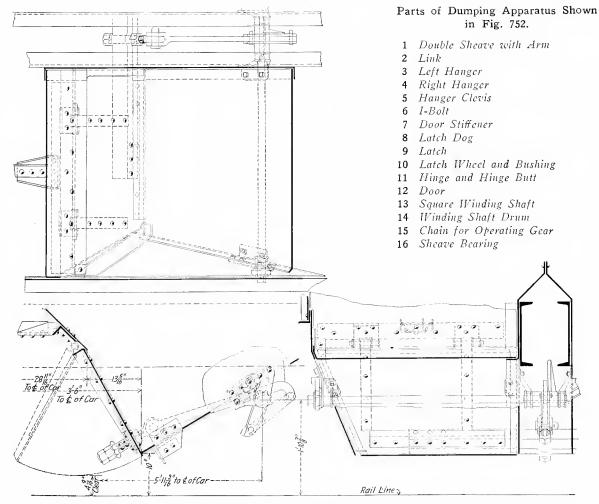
Simonton Door Operating Apparatus for Self-Clearing Hopper Car. Standard Steel Car Company.
